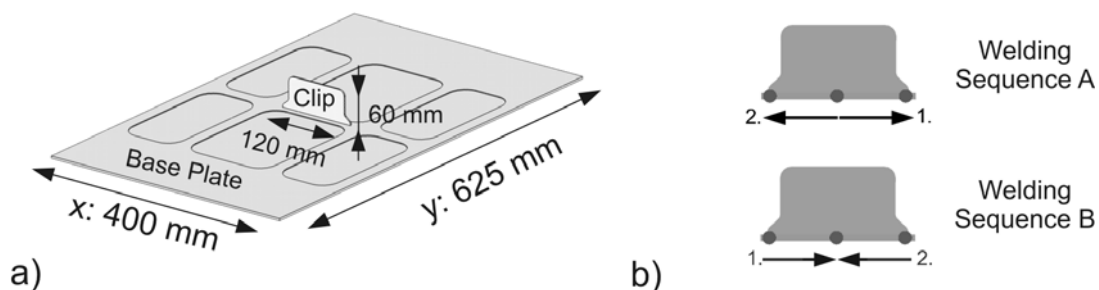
a) Geometry of the samples; b) Different welding sequences.
